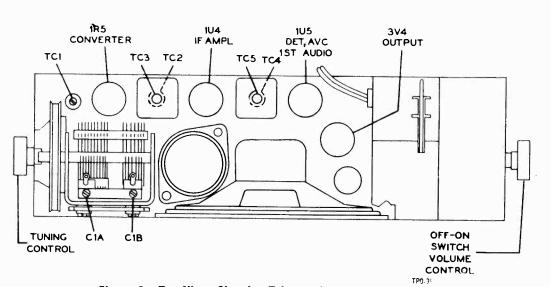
Top View, Showing Trimmer Locations REPLACEMENT PARTS LIST
